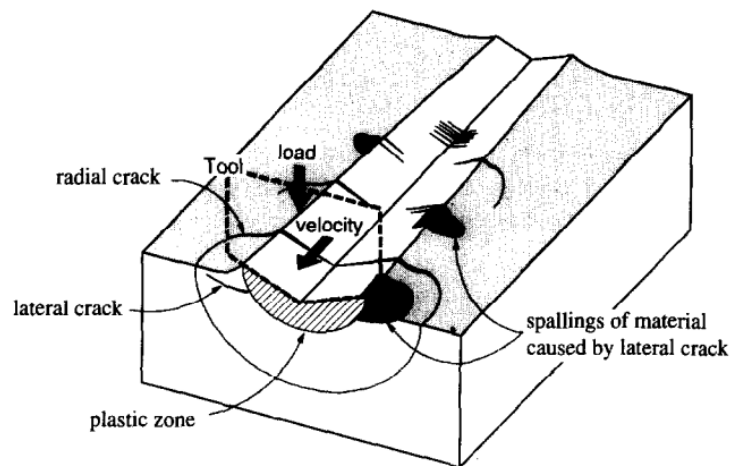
Damage morphology on brittle material subjected to indenting and scratching of a pyramidal cutting tool (Ruff et al. 1995)
